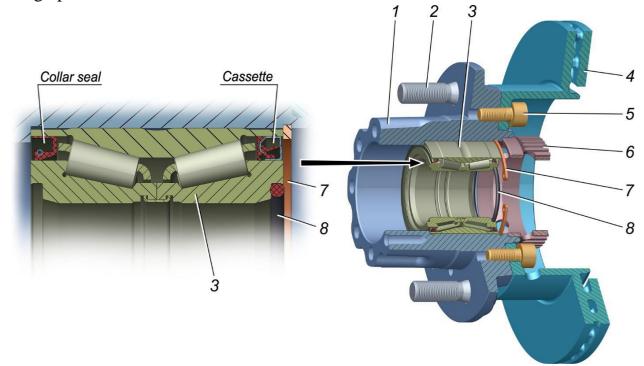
Rear wheel hub with brake disk and bearing: 1 – rear wheel hub; 2 – wheel hub bolt; 3 – double-row taper roller bearing; 4 – brake disk; 5 – screw; 6 – rear ABS rotor; 7 – retaining ring; 8 – sealing ring.
